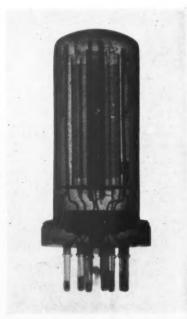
A metal radio tube is inspected by X-ray for internal alignment of parts.
